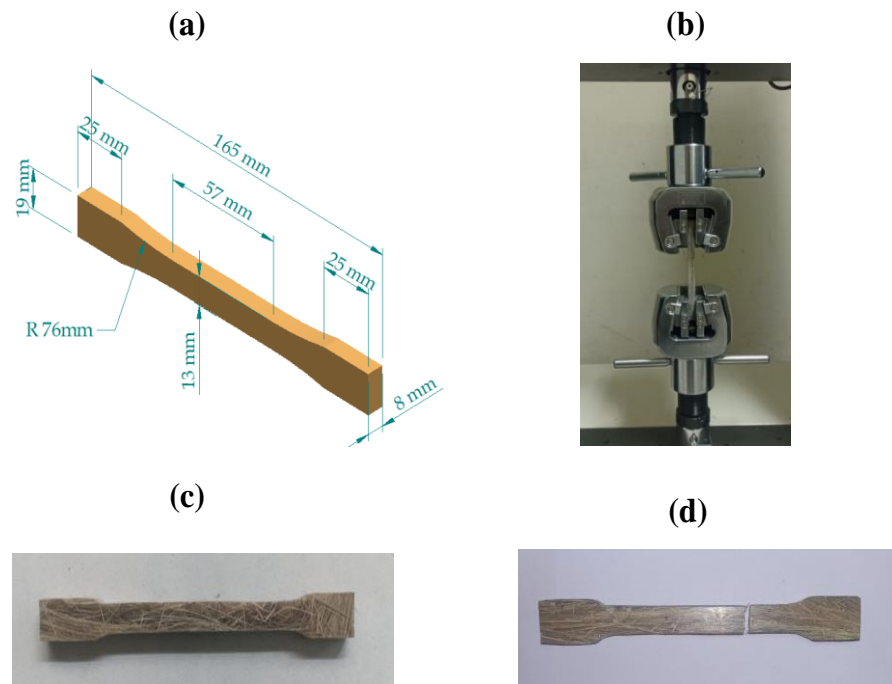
(a) Design tensile test specimens according to ASTM D638 Type 1 standard, (b) Tensile testing, (c) Tensile test specimen before breaking, and (d) Tensile test specimen after breaking
